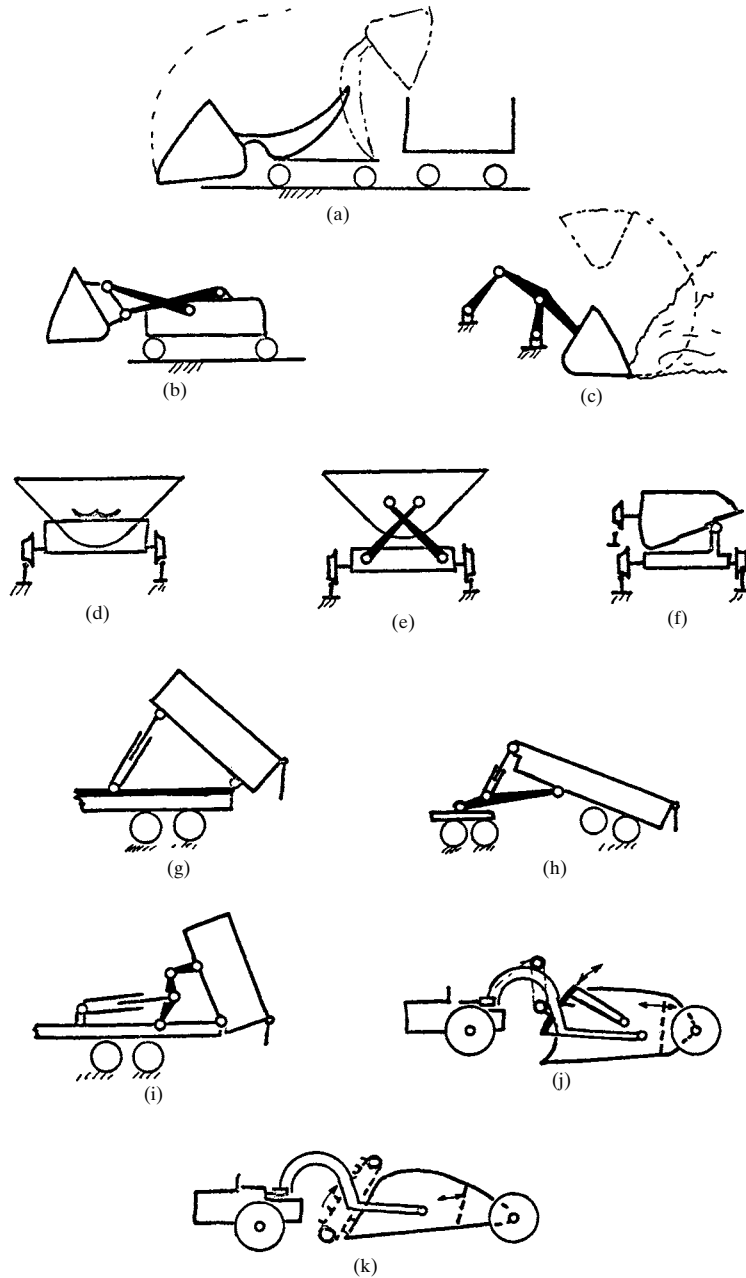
Loading and unloading mechanisms II. (a), (b) Mucking machines; (c) scooping mechanism; (d) to (f) dumping mine cars; (g) to (i) dump trucks; (j) motor scraper; (k) elevating scraper.
